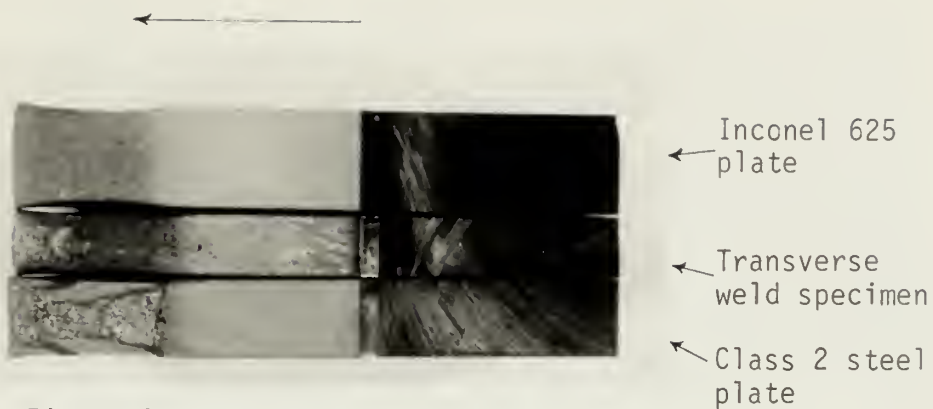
Fatigue specimen fracture surfaces.
